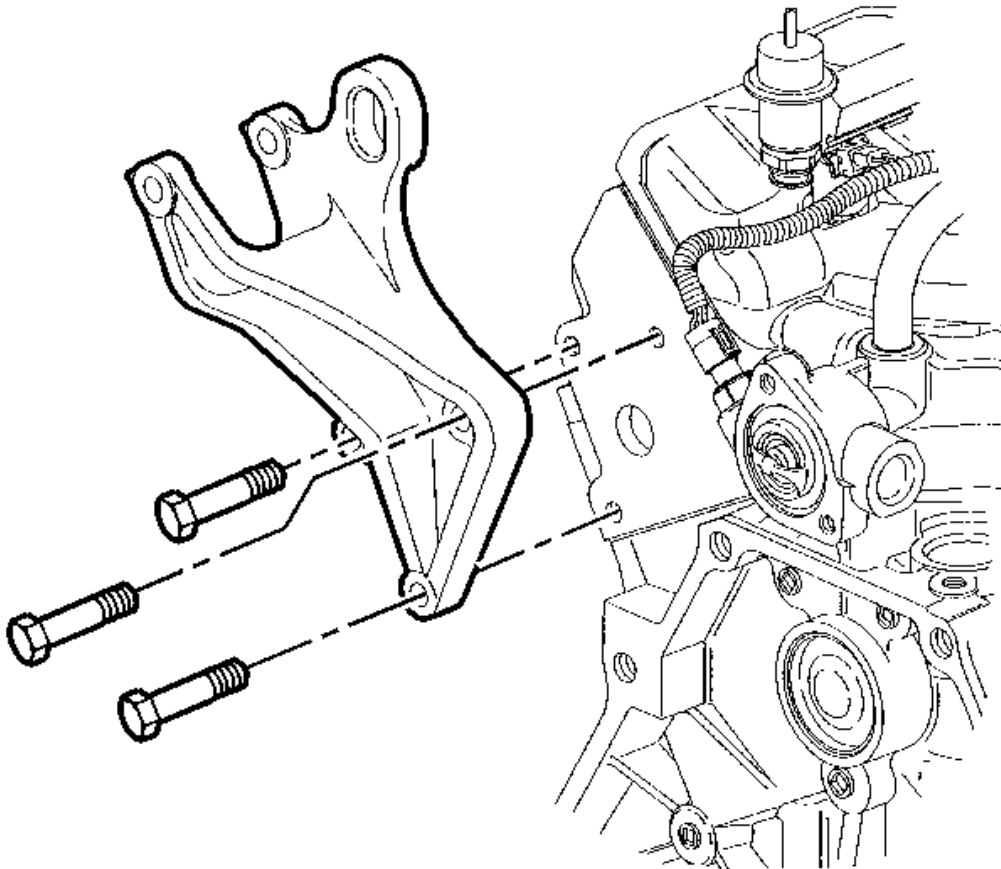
Identifying Engine Mount Strut & Lift Bracket
